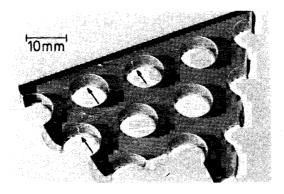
Section of punched perforated plate made of CrNi steel 1.4541; left: fractured flanges; incipient cracks marked by arrows.
